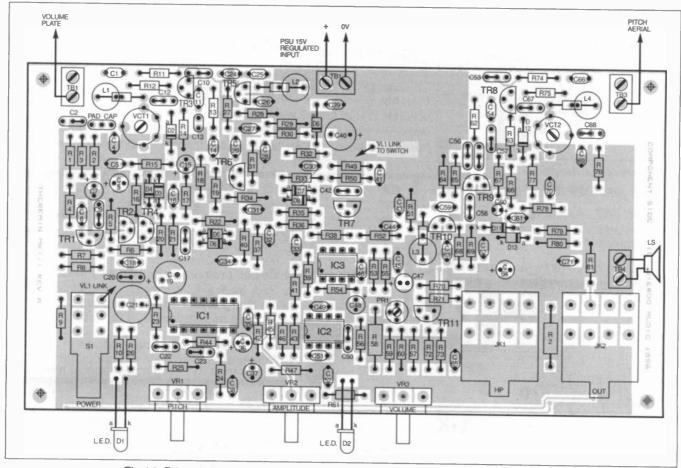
Printed circuit board component layout. This is a double-sided p.t.h. board.
